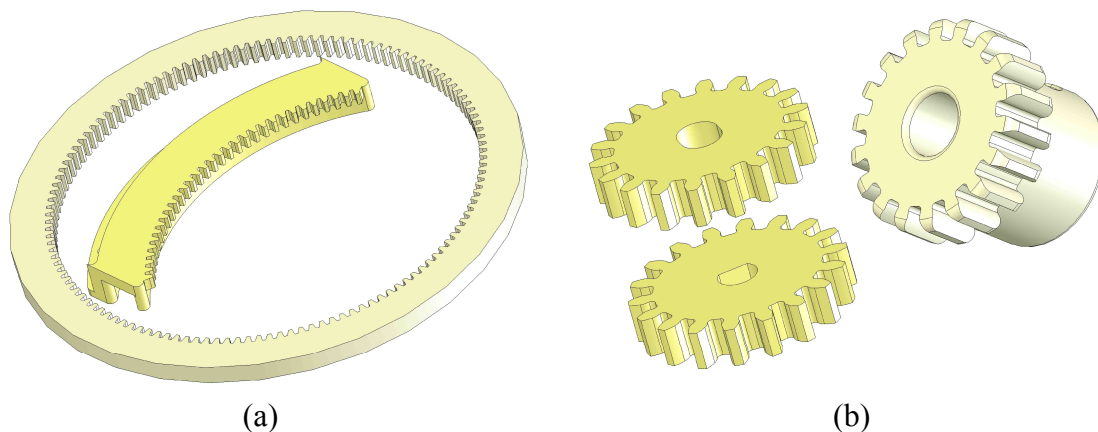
Boston Gears internal gear and the derived slider gearing (a), Boston Gears spur gear and the derived motor and pot gears (b).
